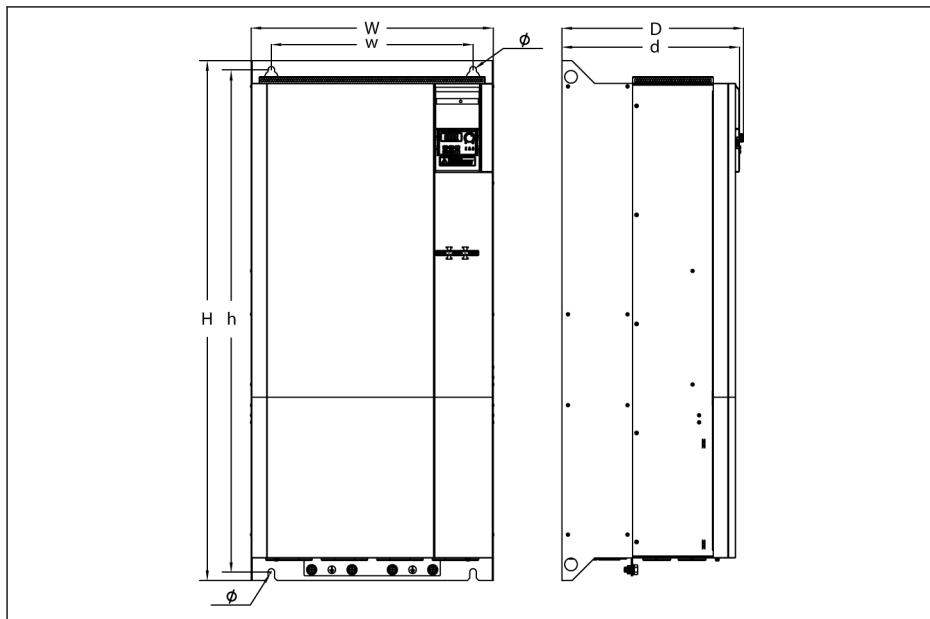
EFC 5610 160K dimensions figure (3P 380 VAC)
